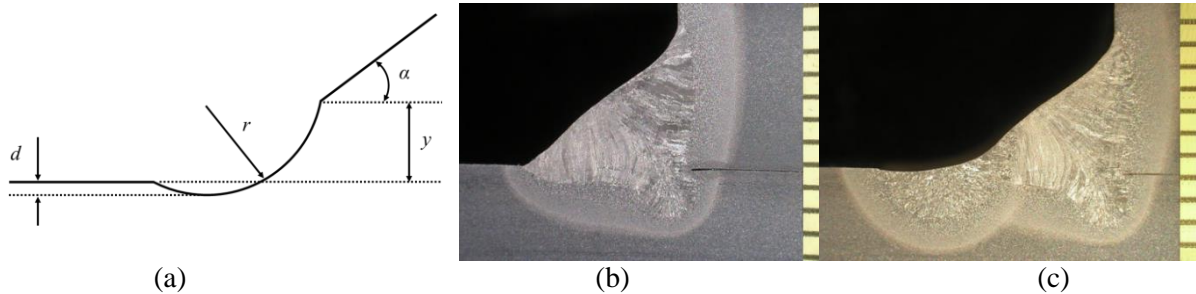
(a) Geometric factors and variables of TIG-dressed specimens; (b) geometry of the weld toe before and (c) after TIG-dressing [7].
